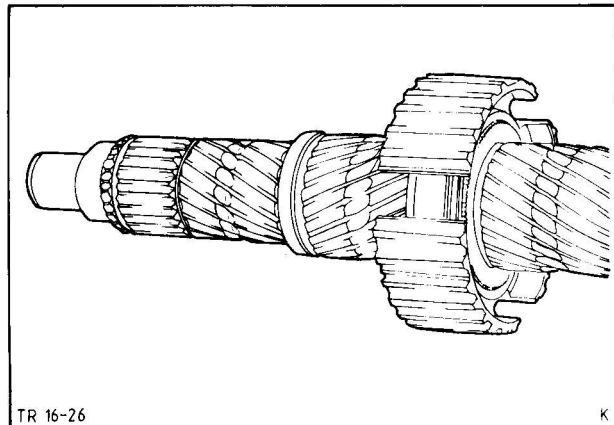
Mainshaft with 1st/2nd gear synchroniser hub
